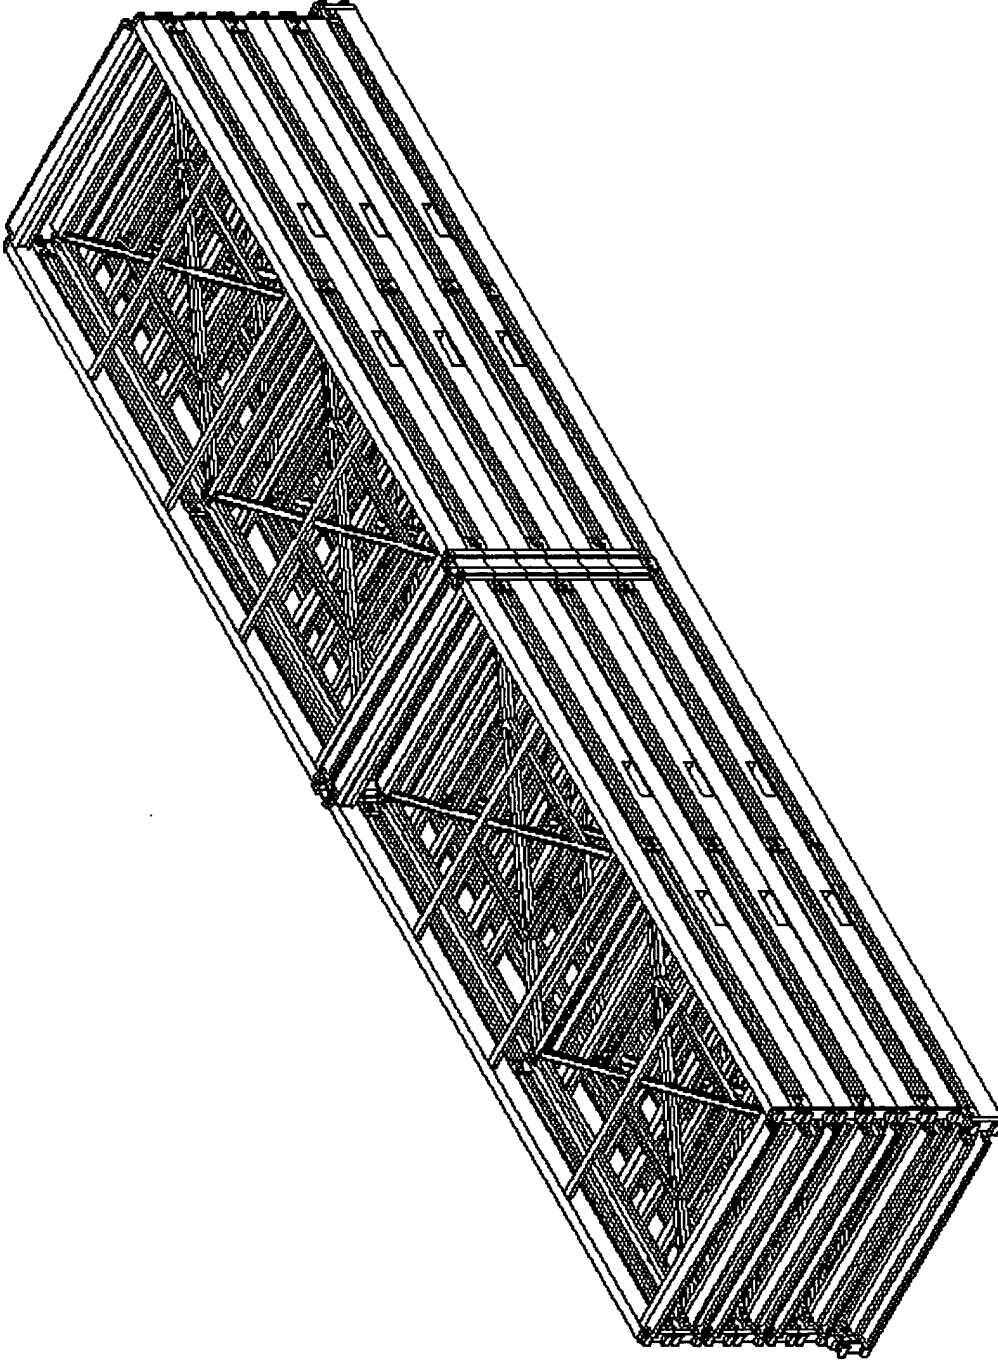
C: Step4 of disassemble and load process: The third "collapsible cargo container frame panel assembly" is stacked on top of previous assembly.
